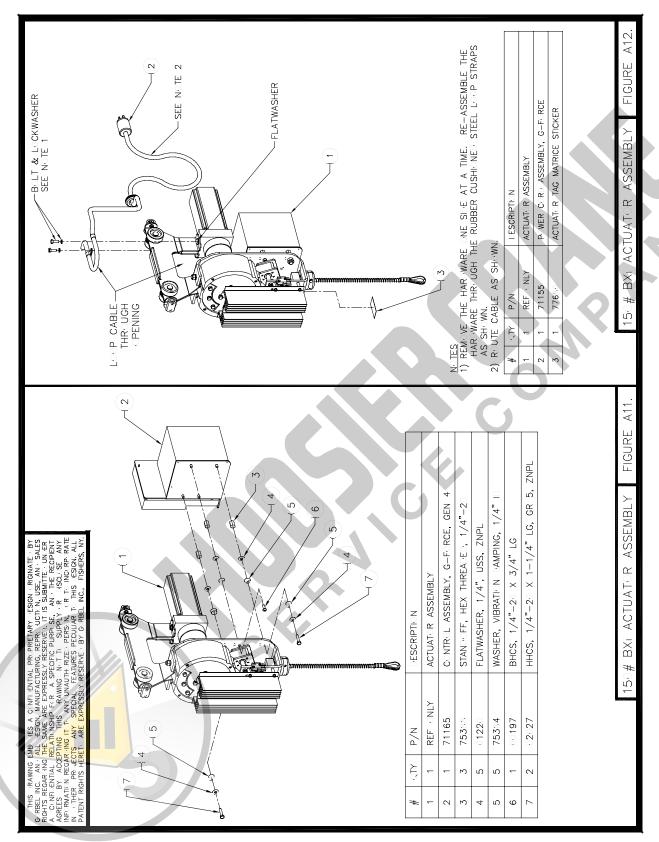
(bottom) & Figure A12 (top). 150# BXi Actuator Assembly.
